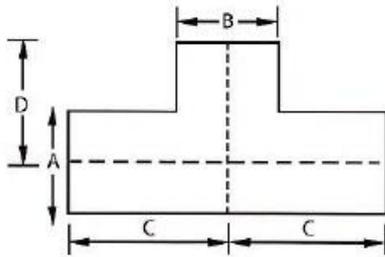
Plain end tee for slip-on type coupling and butt welded joint
